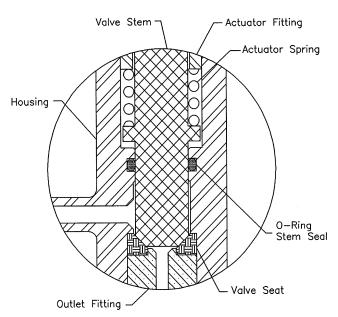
Illustration of mechanical impact between valve seat and stem.
